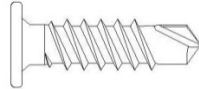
PHILLIPS REDUCED WAFER HEAD (PWH) SELF-DRILLING SCREW (SECTIONS 3.4 AND 3.6)
